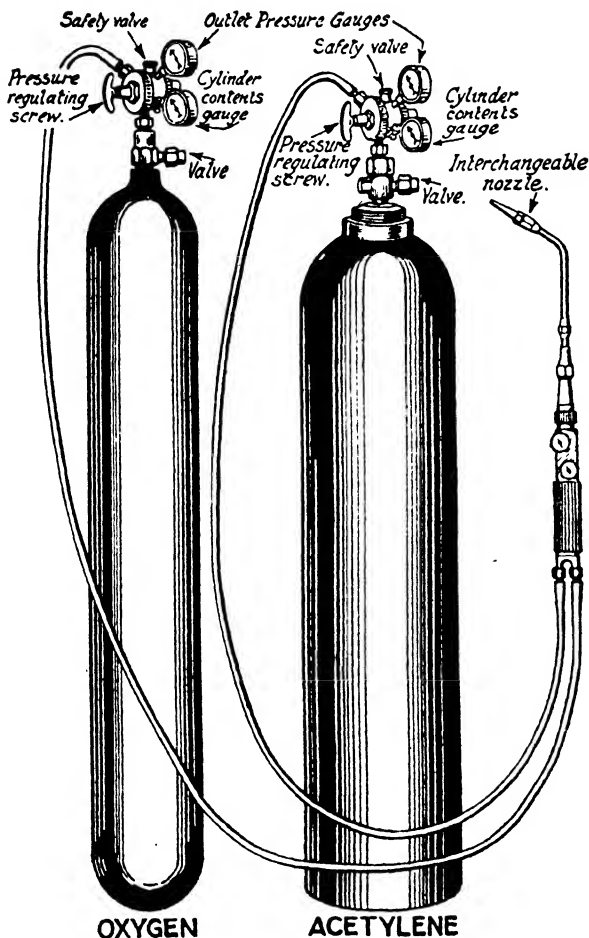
OXY-ACETYLENE WELDING OUTFIT
